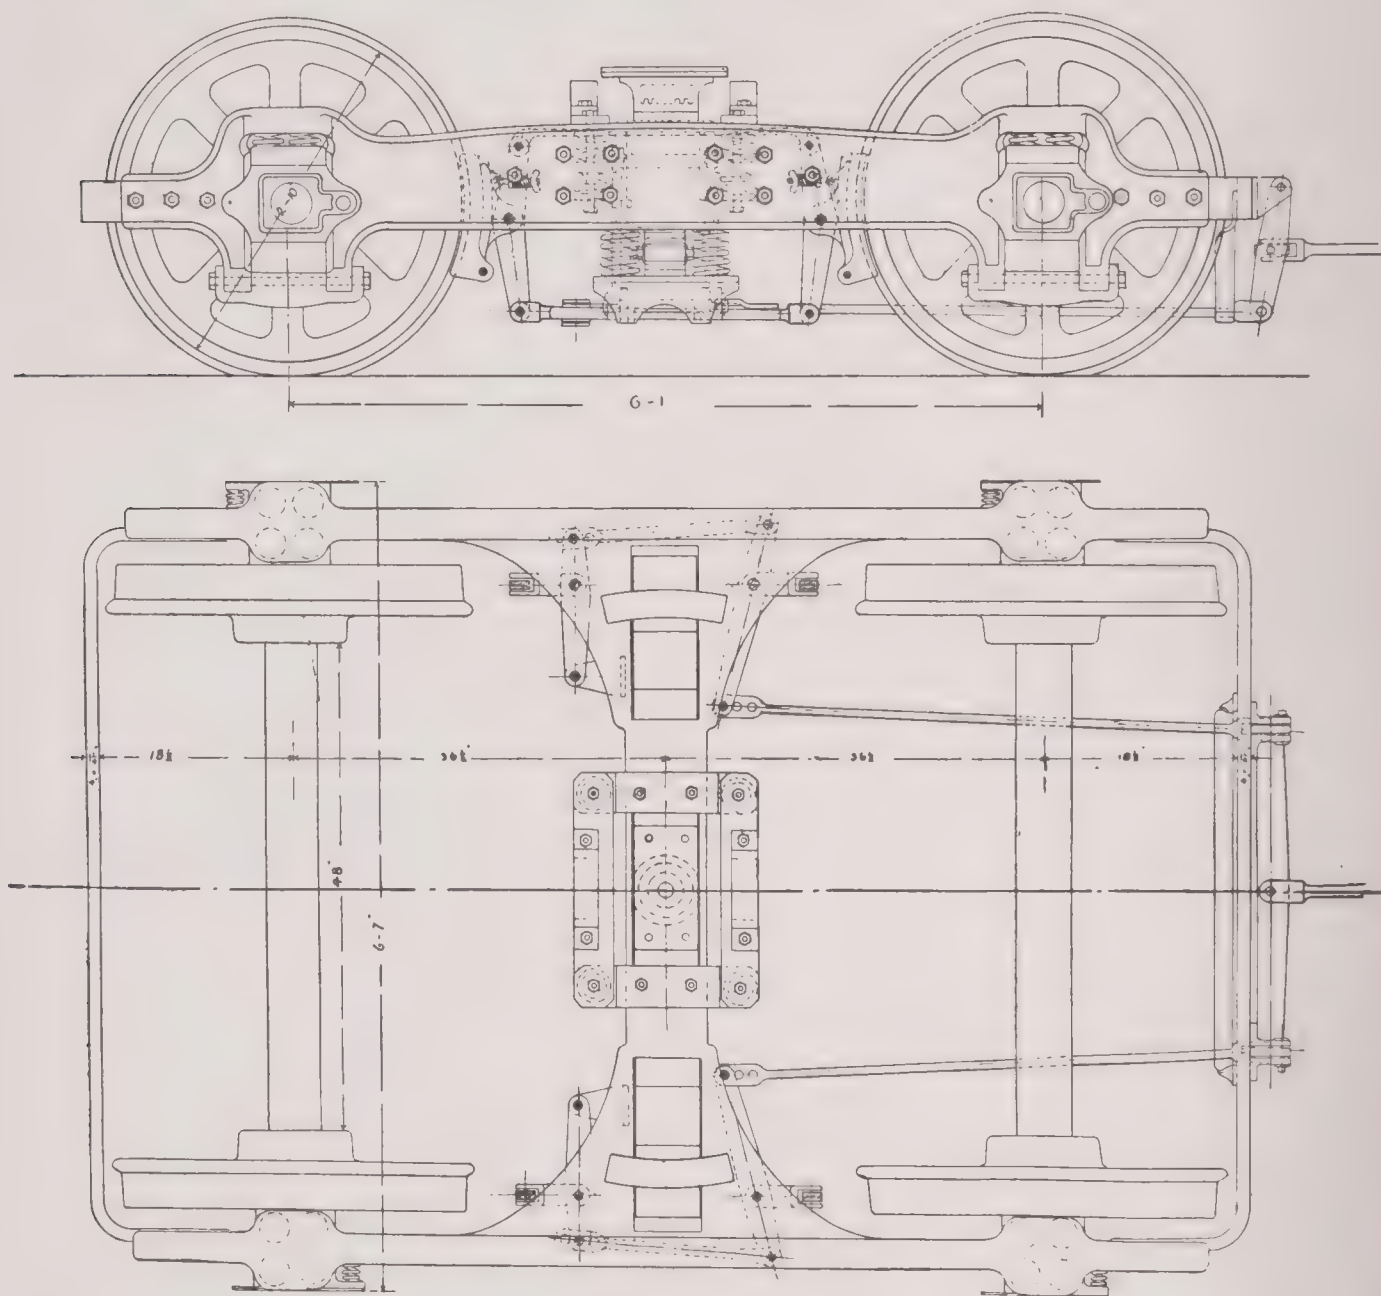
CENTRAL LONDON RAILWAY: CAST STEEL TRAILER BOGIES. GENERAL ARRANGEMENT OF MCGUIRE TRUCK.
